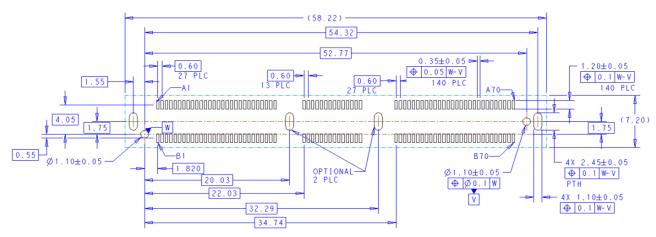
4C STRAIGHT CONNECTOR FOOTPRINT
